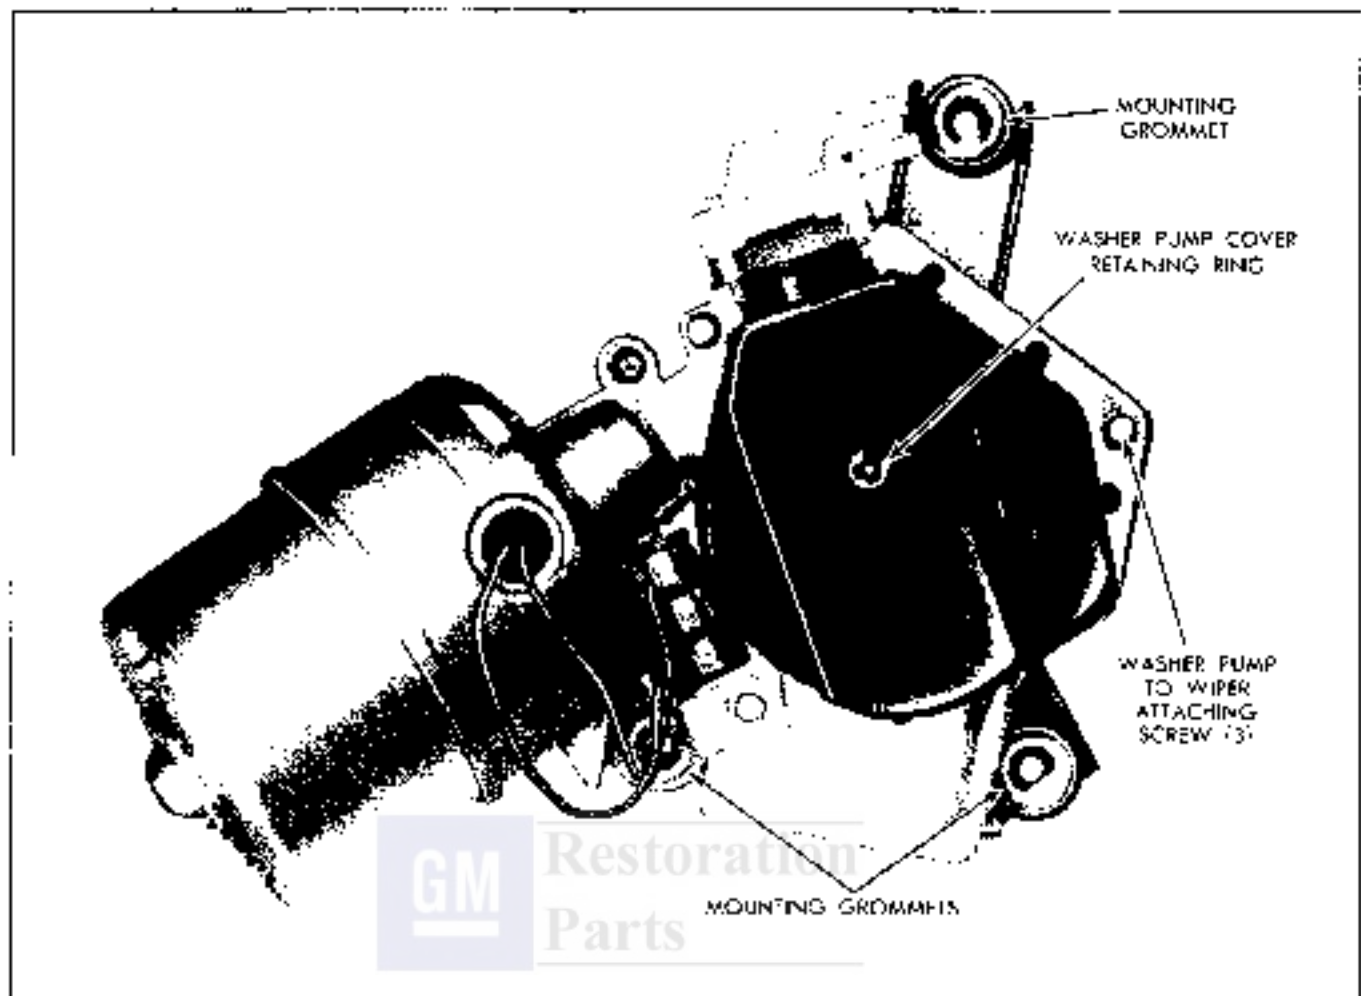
Wiper Motor Assembly—Pontiac—Optional Tempest
